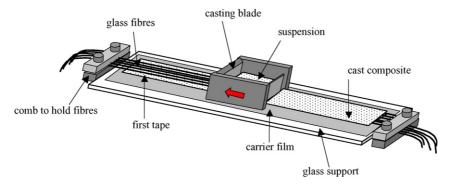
Principle of the device used for the fabrication of composite layers by tape casting.
